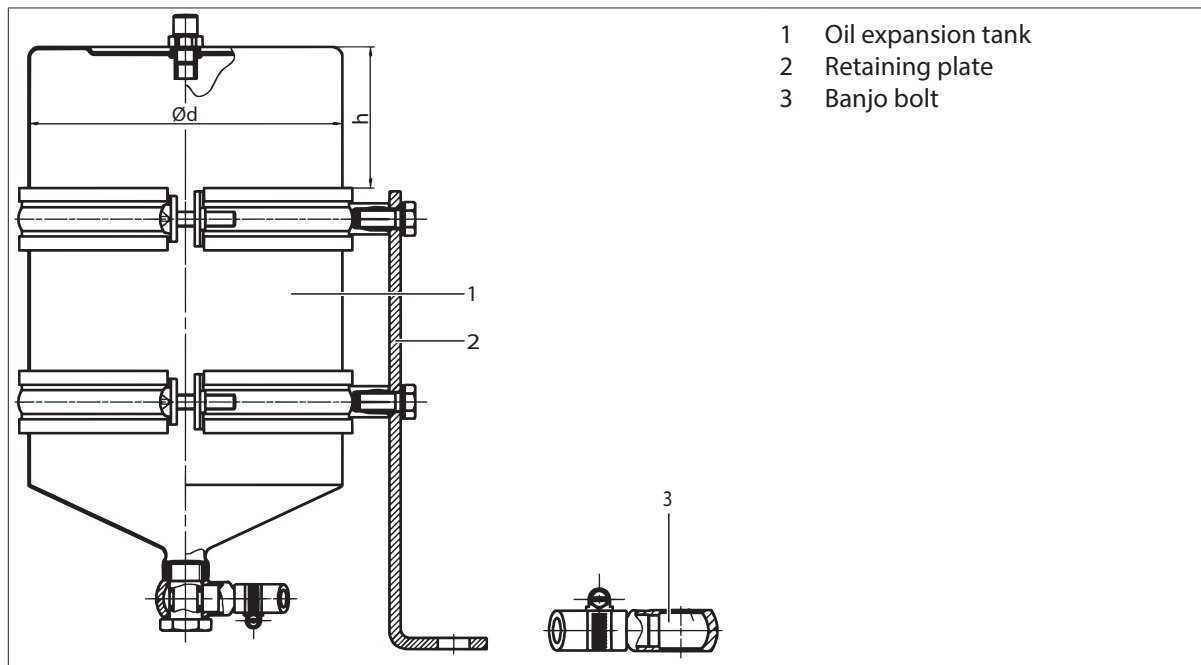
Accessory set, Part 1: Oil expansion tank unit with retaining plate
